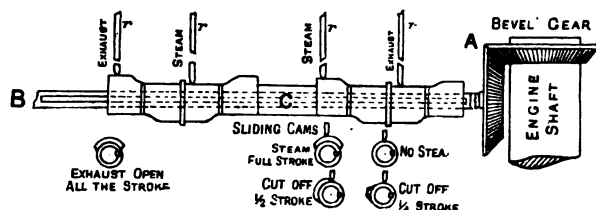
Sliding cam-valve gear for winding-engines. *r*, rods to open the valves.
